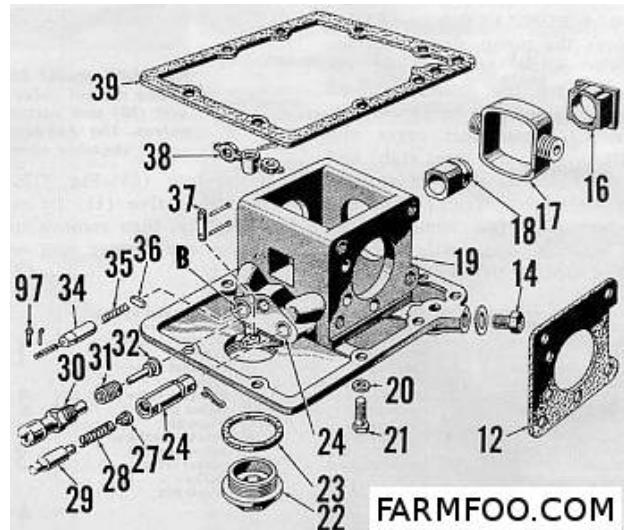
Partial view of hydraulic pump and valves unit used on model 8N tractors. Omitted are the pump driving cam and the valve chambers with their inlet and outlet valves. Refer to Fig. F092 for legend.
